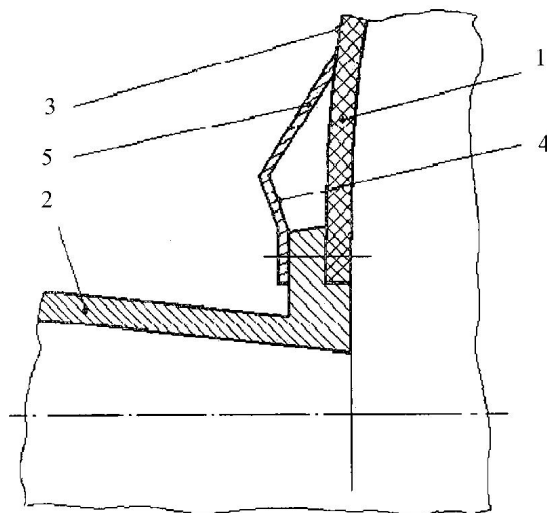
Integrated fuel tank with metal flanged inlet
